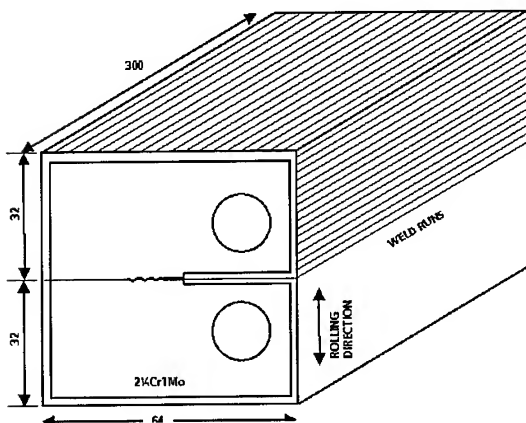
Schematic weld pad and 25mm CT sample location
